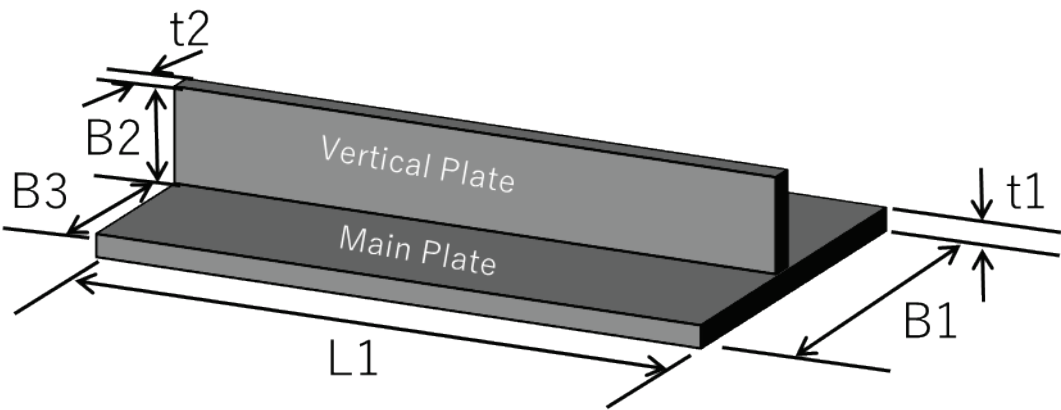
Test piece used for the Tee shaped-joint welding.
